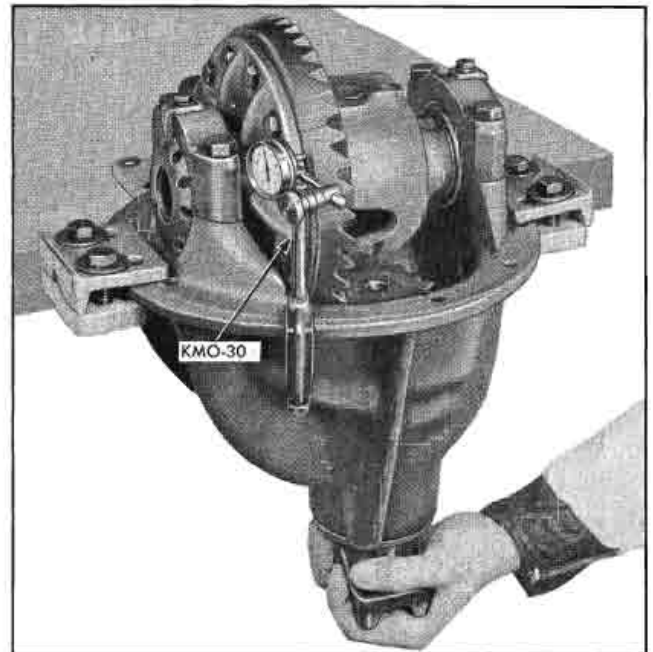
Checking Ring Gear Run-out with KMO-30 Set
